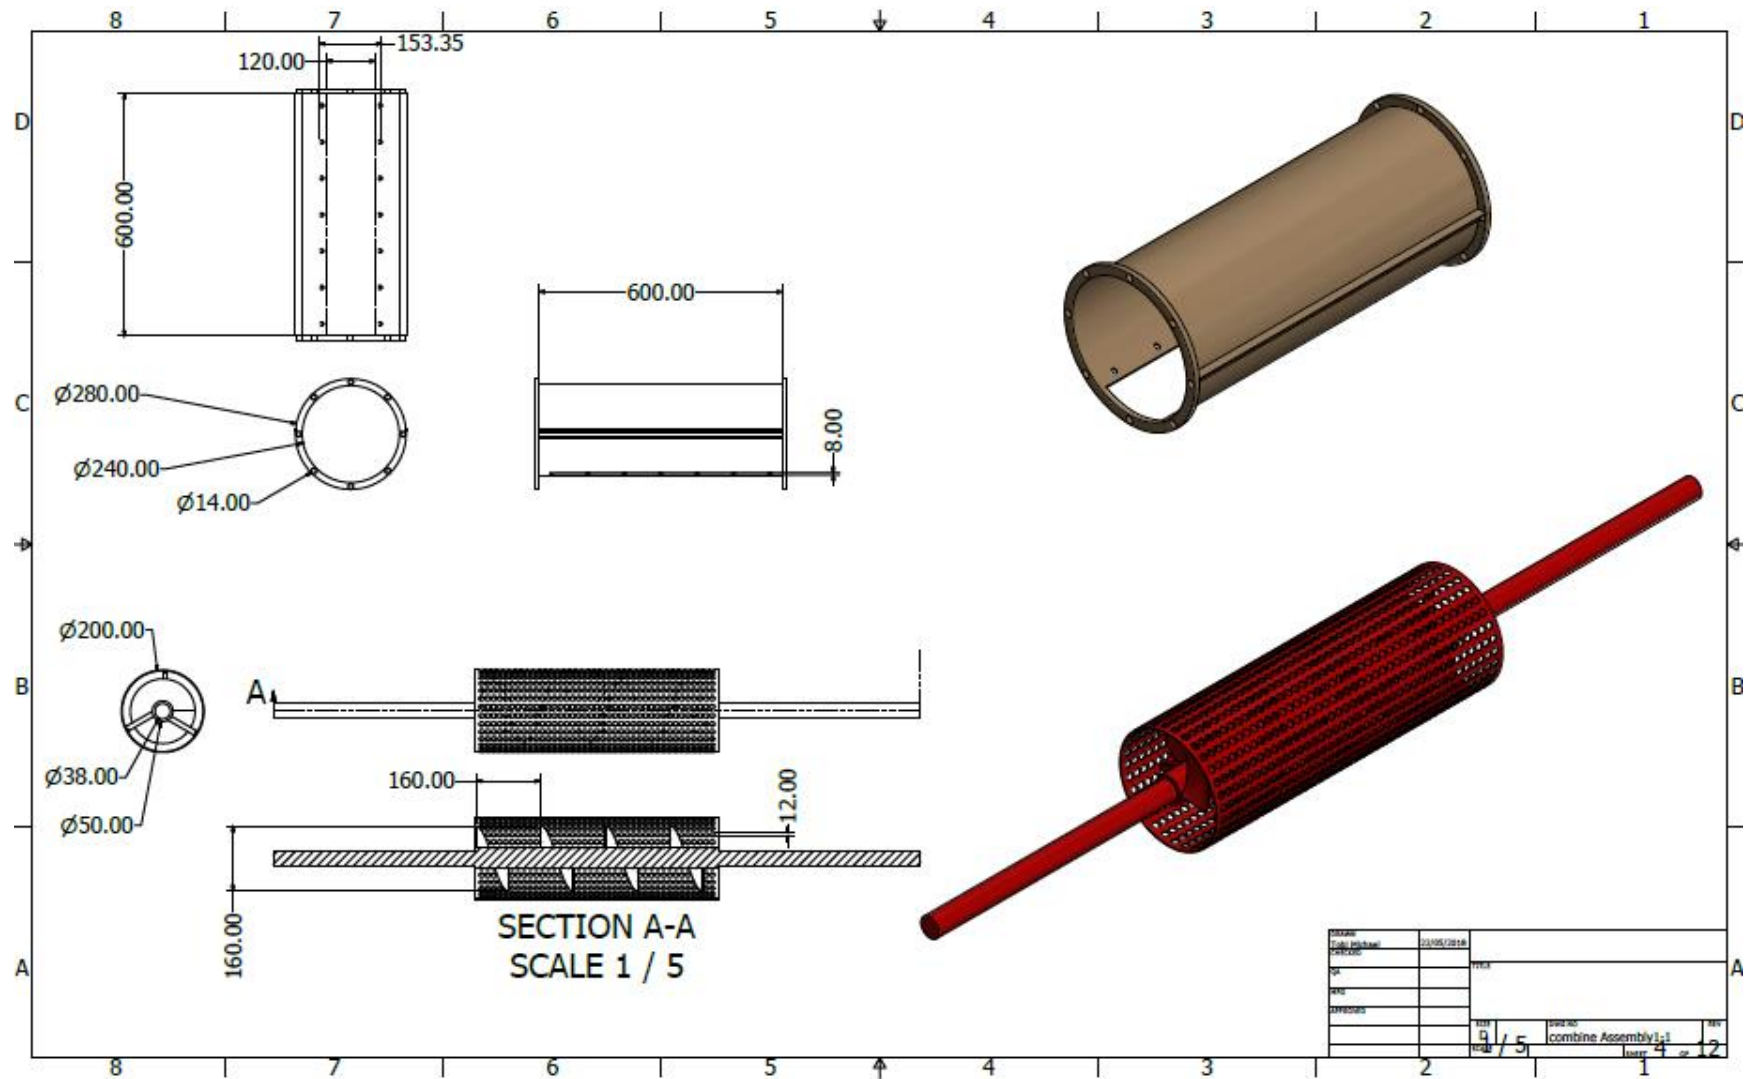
Design drawing for the first separating unit sieve drum and screw conveyor
